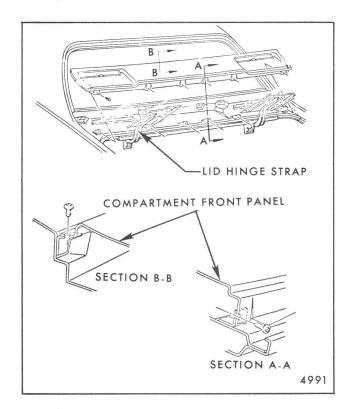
Rear Compartment Front Panel - Oldsmobile "E" Style
